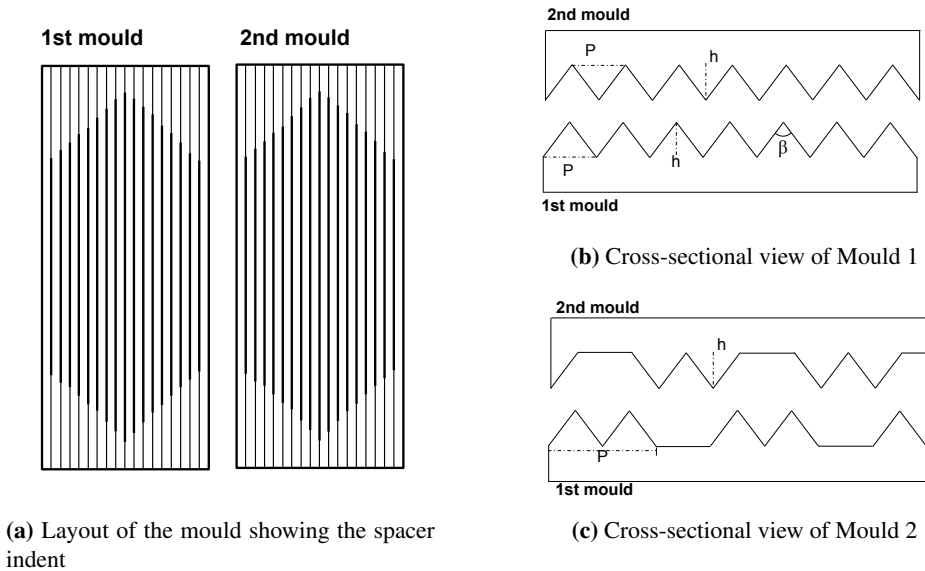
The mould imprint and the cross-sectional view of Mould 1 and 2
